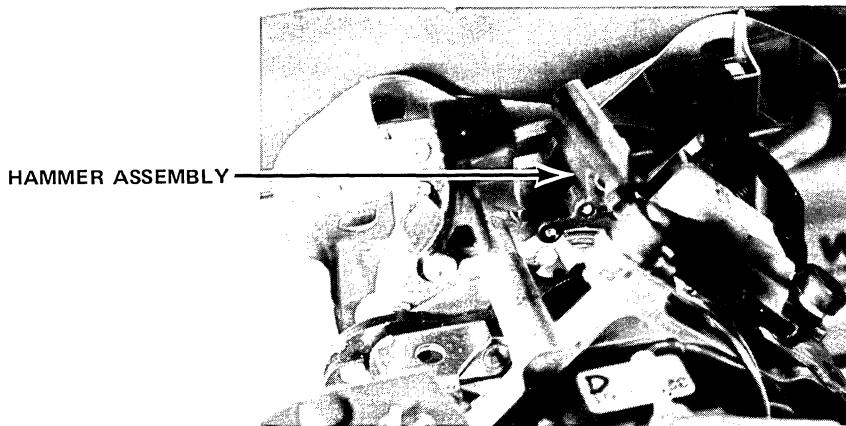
NONADJUSTABLE HAMMER ASSEMBLY
